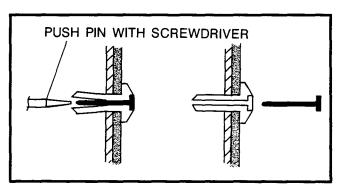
REMOVAL OF PLASTIC RIVETS
